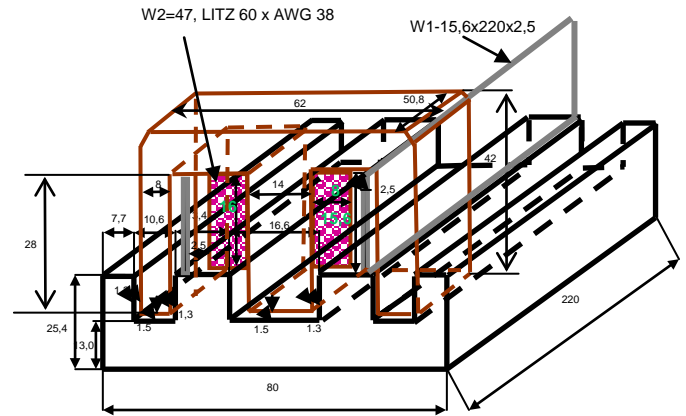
Dimensions of HFIPT prototype with a multi-turn secondary winding.
